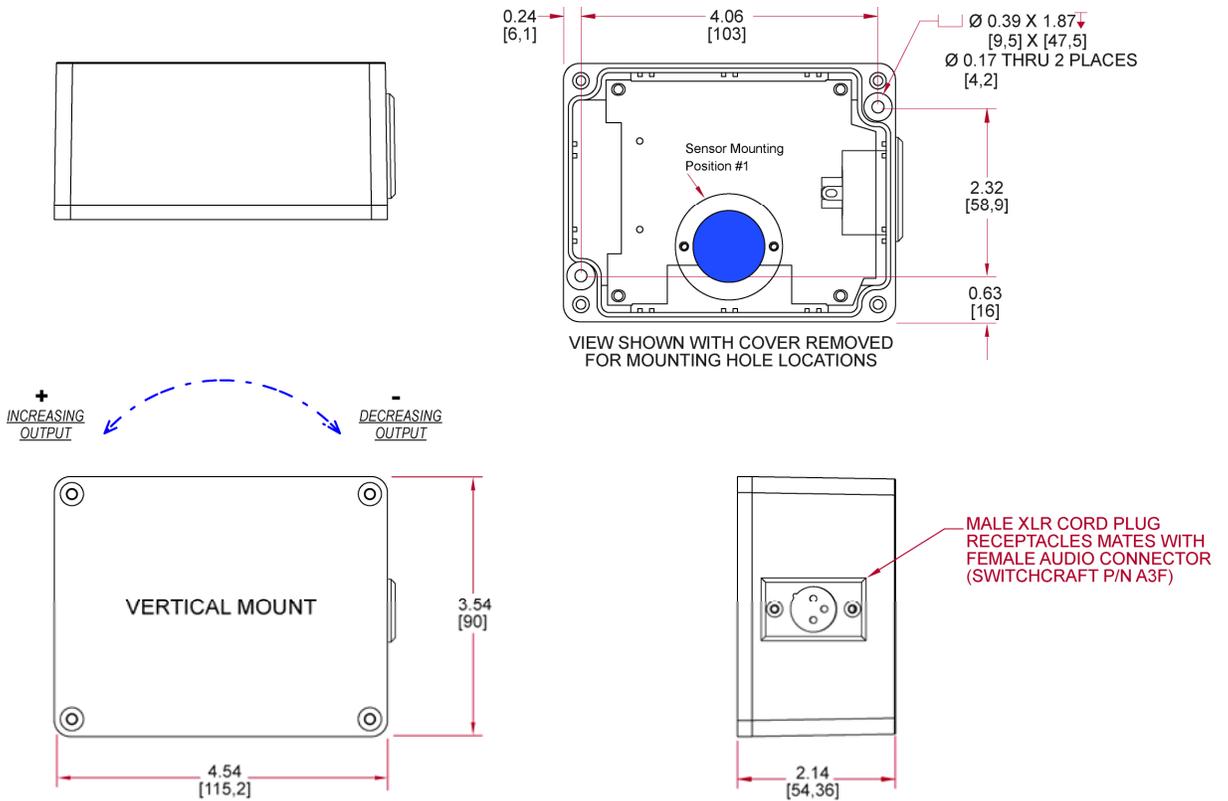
B: Remote Inclinator Housing Dimensions (inches [mm]) - (Vertical Mount)
